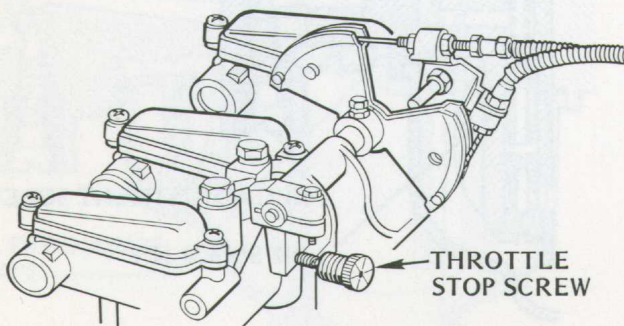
Throttle Valve Linkage for Multiple Carburetors
